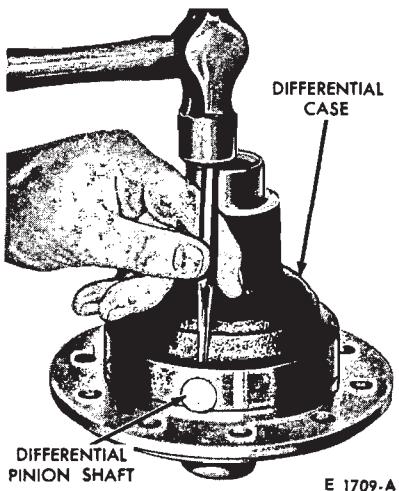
Removing Differential Pinion Shaft Lock Pin
